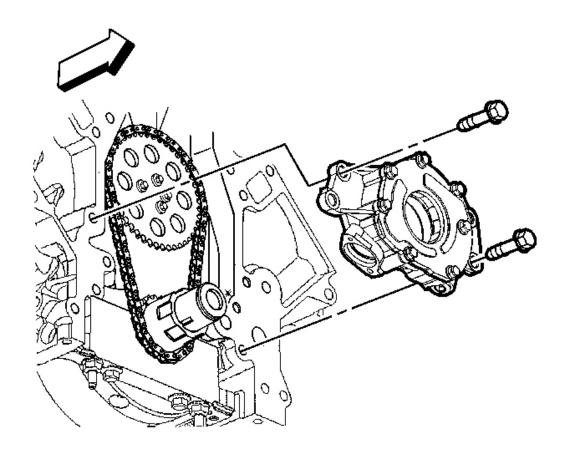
View Of Oil Pump & Bolt Courtesy of GENERAL MOTORS CORP.
